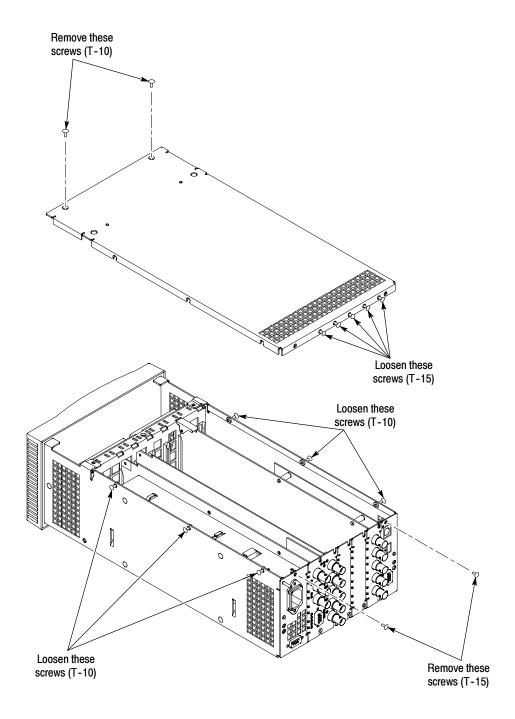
WFM700 chassis, showing screws to loosen and remove
